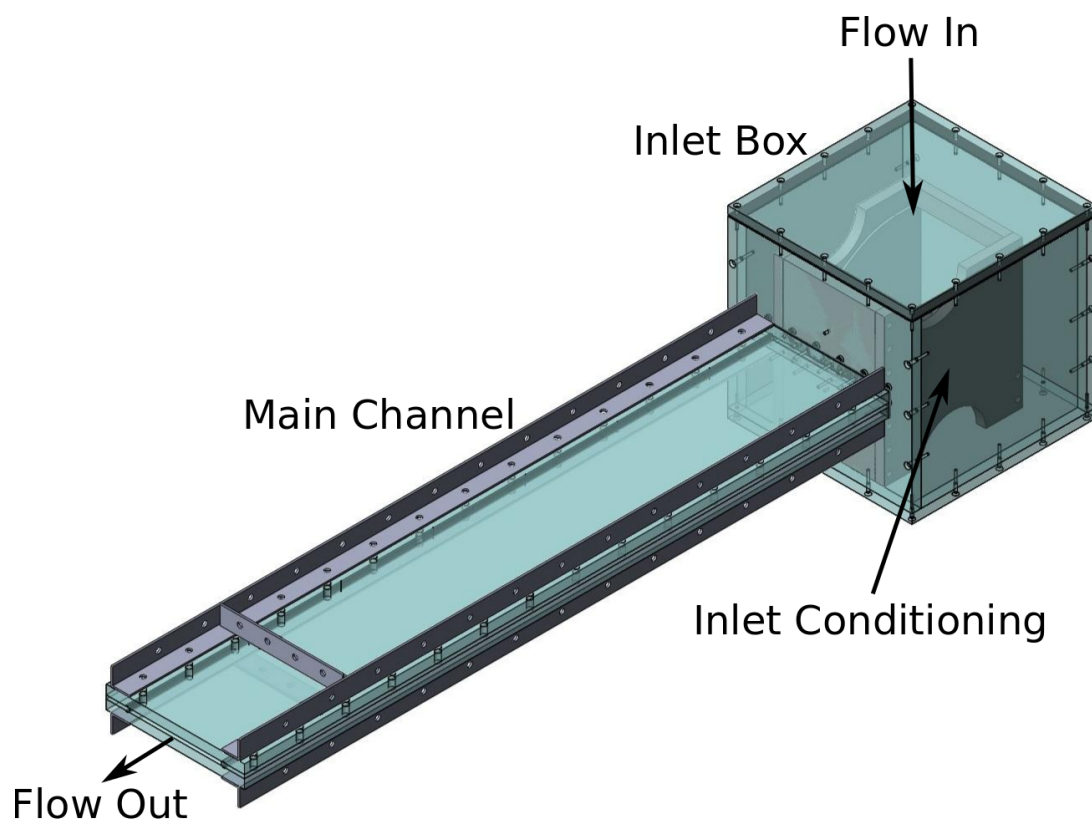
Assembly of main channel including inlet box for inlet and support struts
